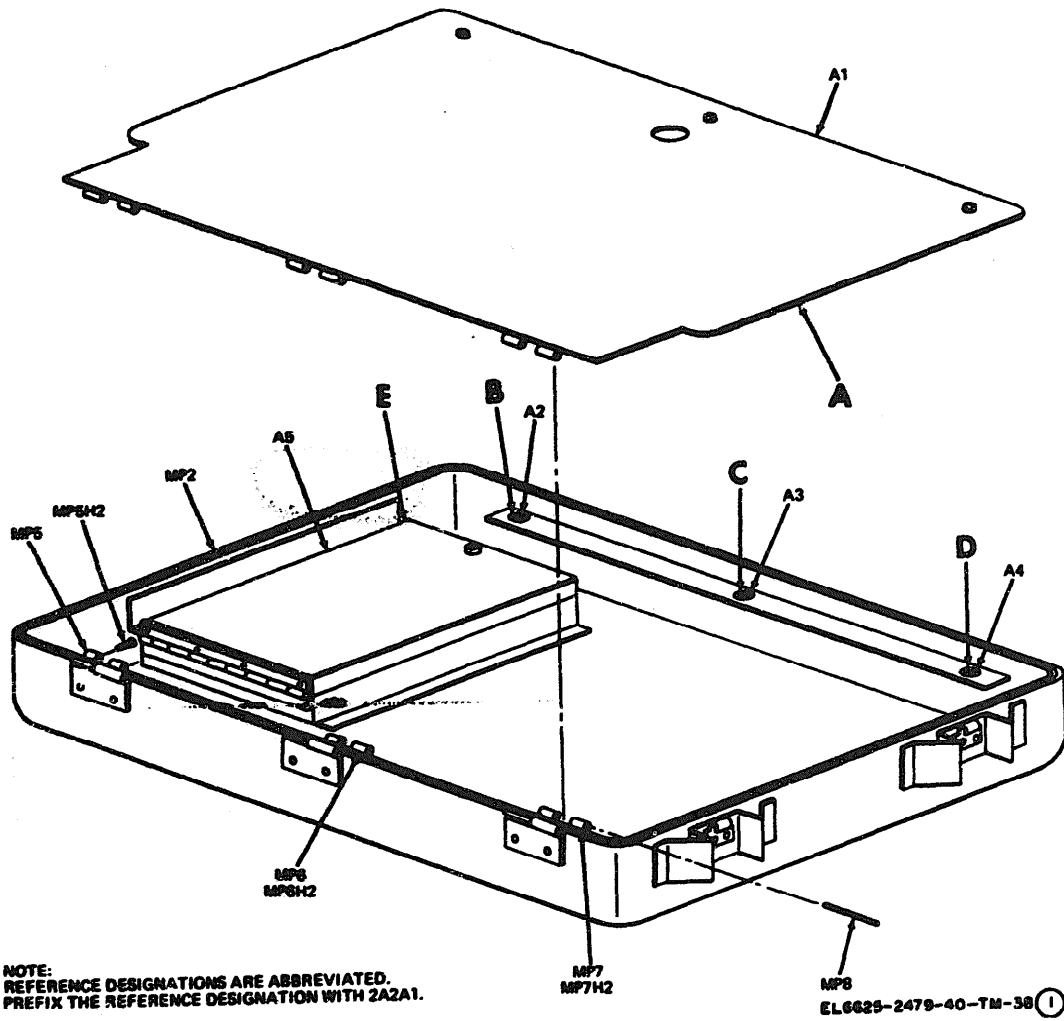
, ⑩. Case cover assembly 2S2, parts location (part 1 of 2.)
